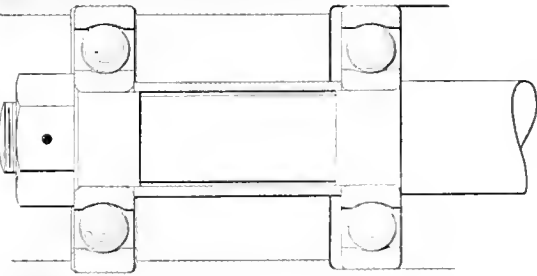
Radial Bearings Arranged to take Axial Thrust
